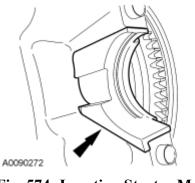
Locating Starter Motor Isolator Courtesy of FORD MOTOR CO.
